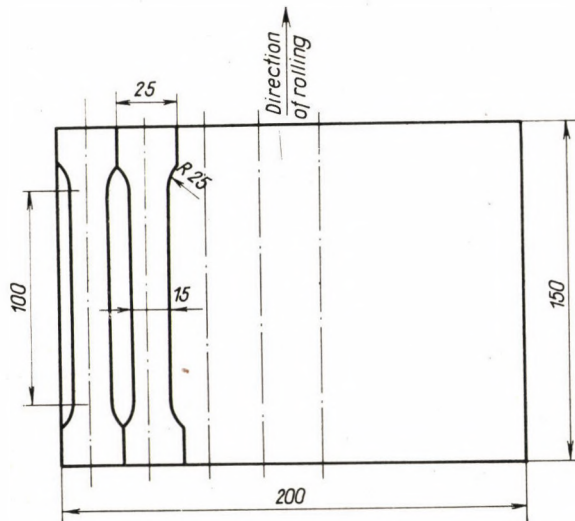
Project for cutting the test pieces from plates used for ultrasonic testing
